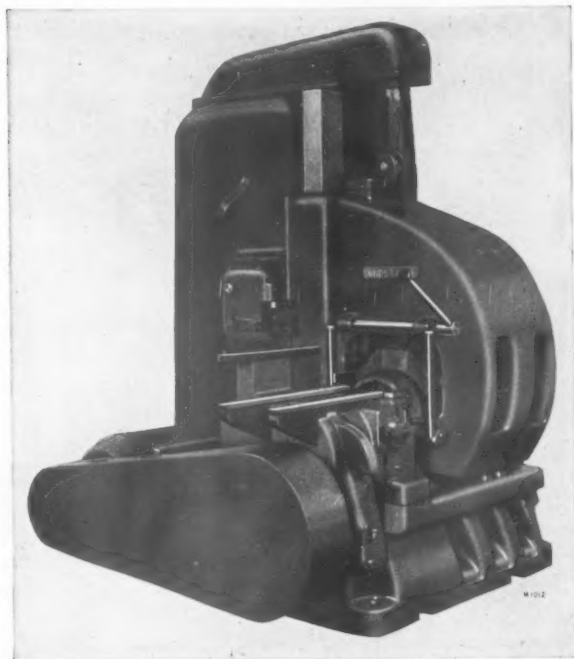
Rigidmil with built-in fixture, hydraulic operating and clamping, automatic lubrication.
